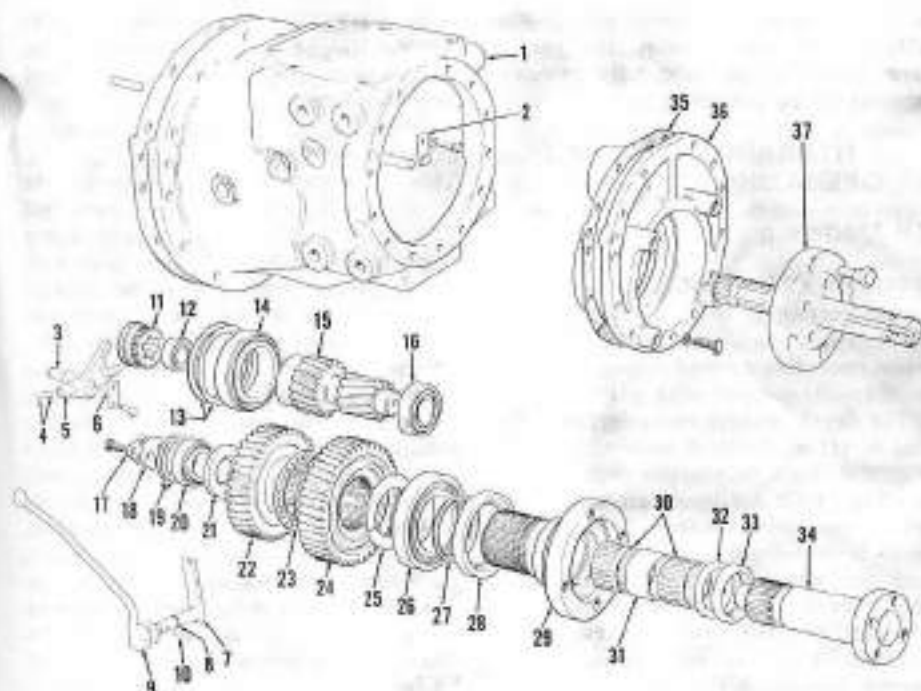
Exploded view of reversible shaft pto available on 1410 and 1412 models. Output shaft (37) can be installed with line spline out with attaching screws installed at inner diameter into shaft (34) for high speed output. Output shaft (37) can be installed as shown with attaching screws installed through holes farther from center into shaft (29) for lower pto output shaft speed.
